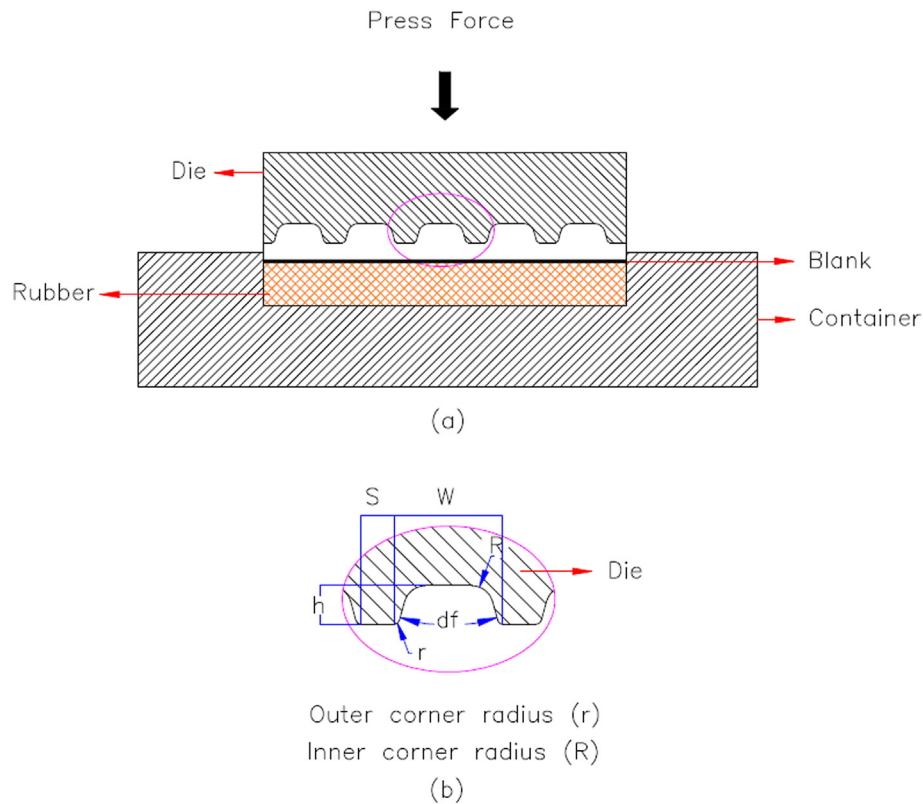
a) A schematic of the rubber pad forming setup, b) geometrical features of the die.
